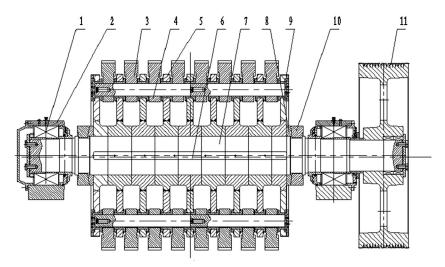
Diagram of rotors of the DPF crusher. 1-bearing, 2-bearing support, 3-hammerhead, 4-hammer shaft, 5-hammer plate, 6-key principle axis, 7-principle axis, 8-terminal cover, 9-terminal plate, 10-clamp, 11-belt pulley.
